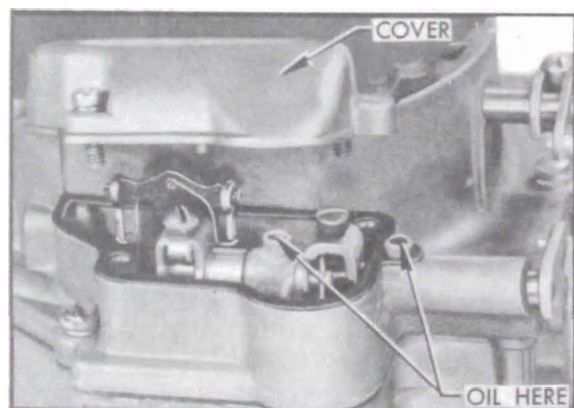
Countershaft Lubrication—Carter 4-Barrel
